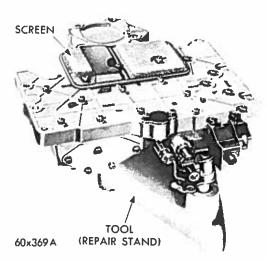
Removing or Installing Oil Screen (Tool C-3749)
